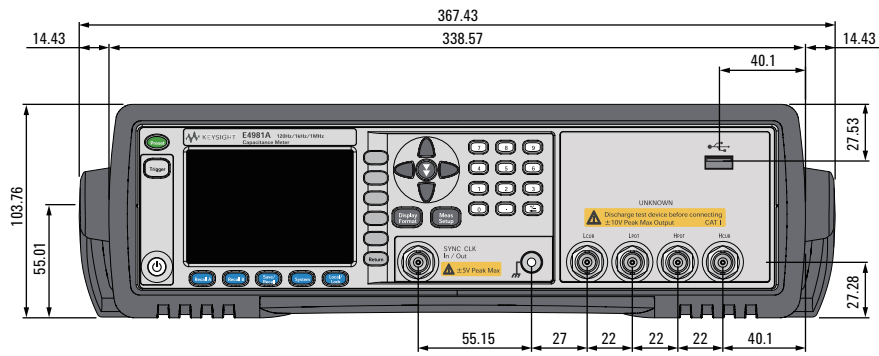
Dimensions (front view, with handle and bumper, in millimeters, nominal)
